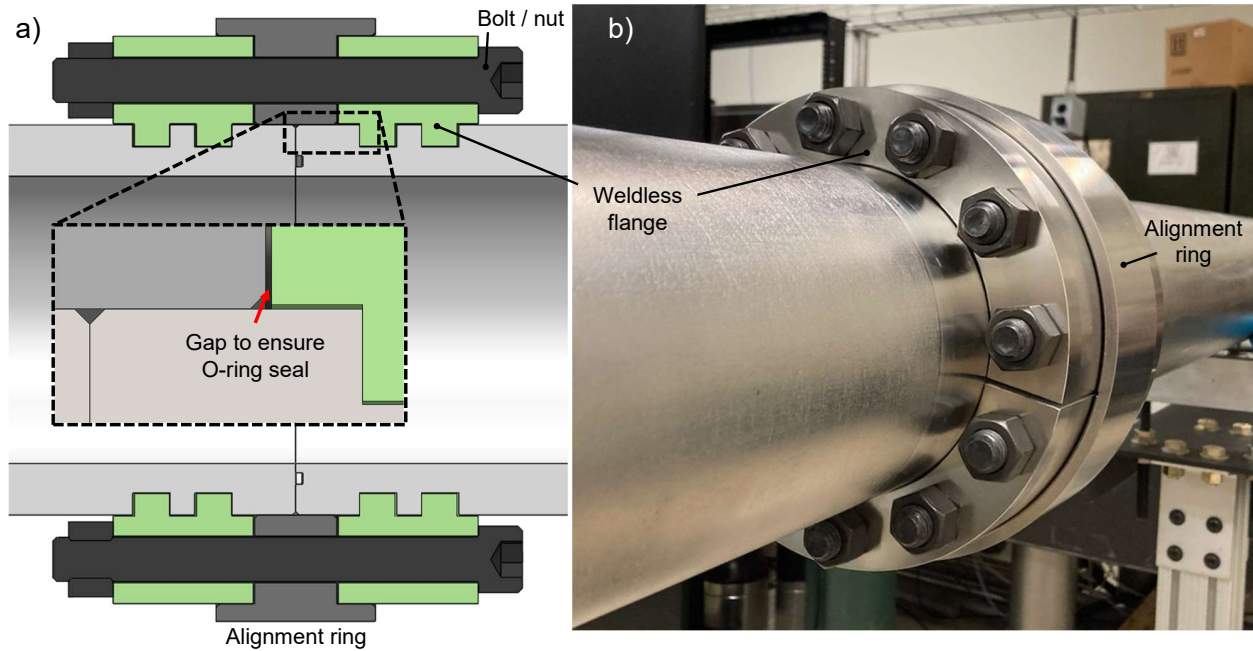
Weldless flanges connecting the driver to the driver extension of the HPST. a) CAD cross section along the shock tube's axis, detailing the weldless flanges. b) View of the weldless flange connection showing the split flange design which allows for assembly of the bolted connection.
